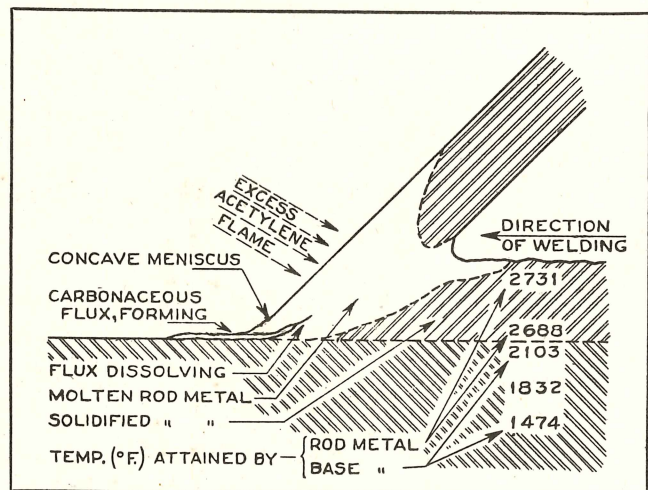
Diagrammatic Sketch showing important points regarding Excess-acetylene Welding.
